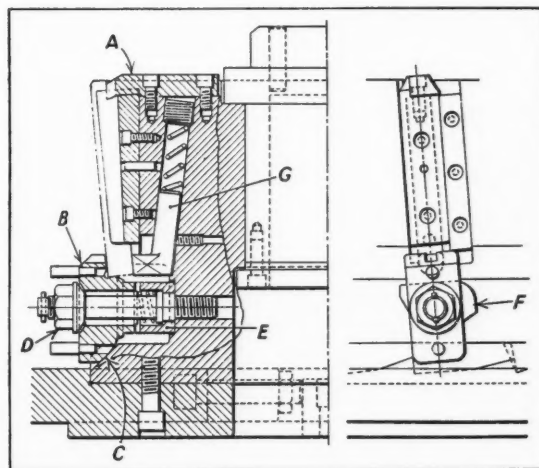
Part-sectional view of the work-holding fixture for milling concave form on turbine blades. The fixture accommodates fourteen blades
